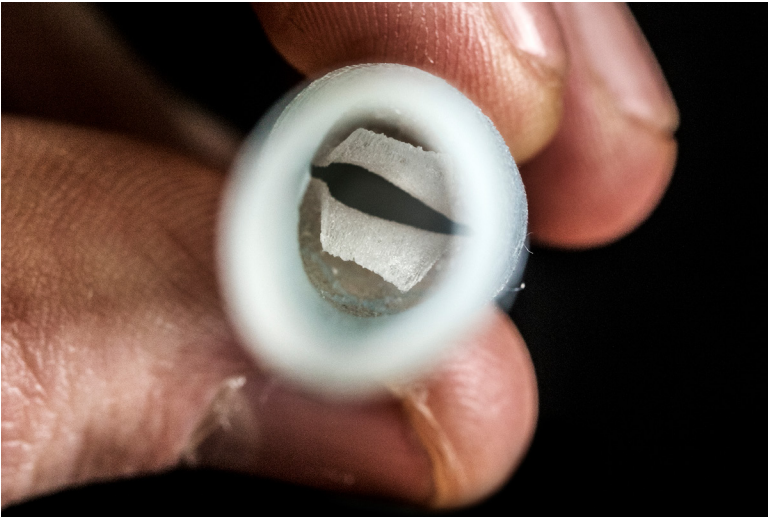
Valve leaflets bowing open due to being too thin and spaced apart.
